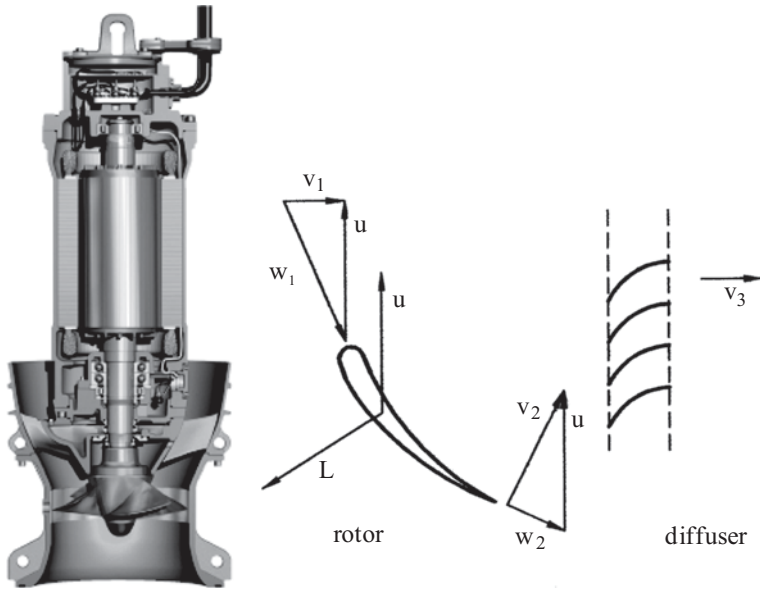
Axial pump (courtesy Flygt, a Xylem company); cylindrical section of a rotor blade and the diffuser ring
